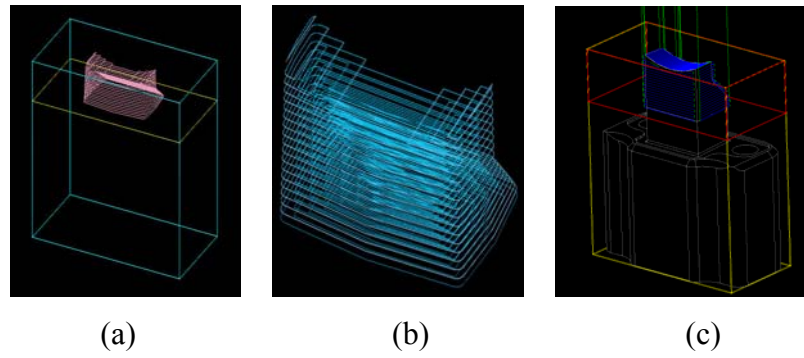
(a) Slices and (b) Deposition paths (close up) (c) Surface machining toolpath.
